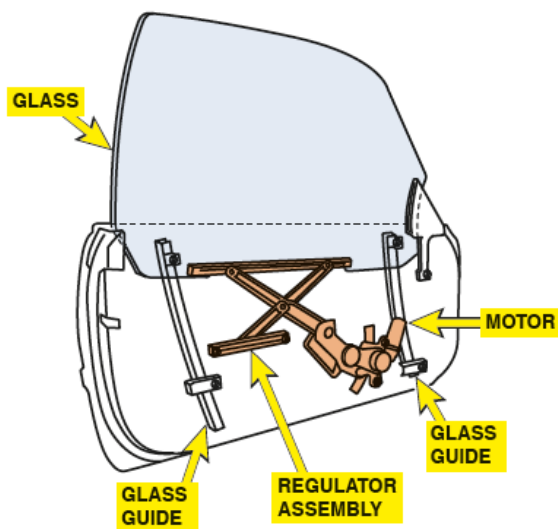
An electric motor and a regulator assembly raise and lower the glass on a power window.
